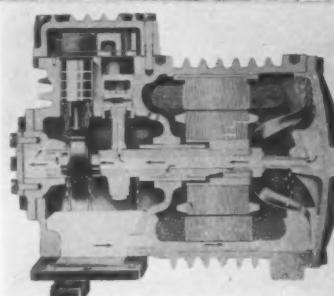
Oiling circuit of "Coplamatic Twin" refrigerating unit, which employs a distinctive method of developing force feed lubrication without an oil pump. A propeller secured to the eccentric and rotor shaft lifts oil to a reservoir above the shaft center line. Oil is drawn from this supply by centrifugal force.
